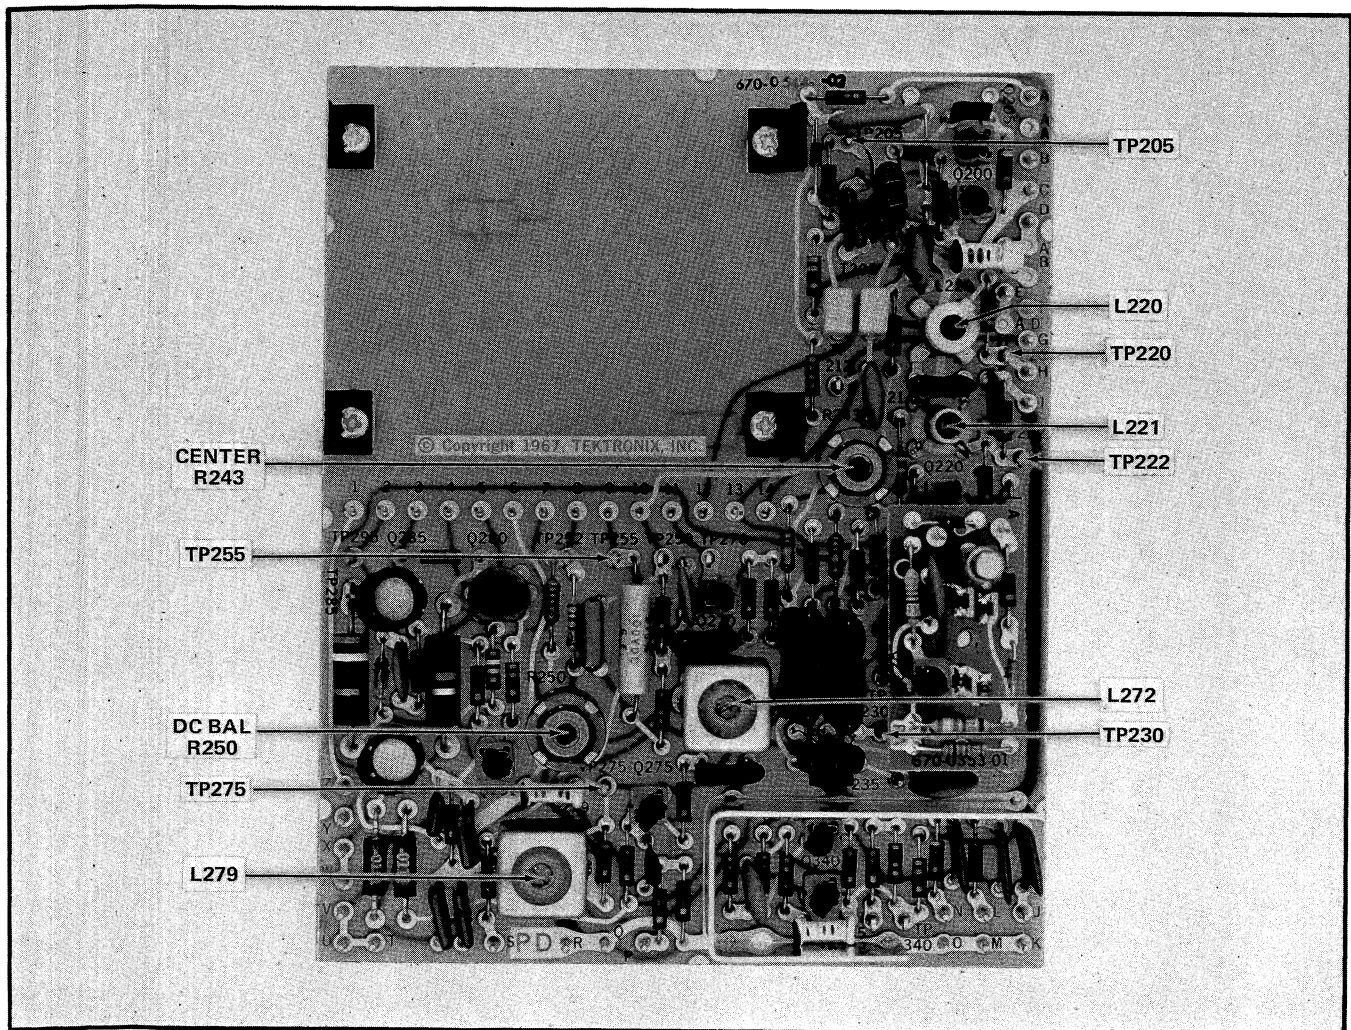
A. Subcarrier regenerator board test point and adjustment locations for instruments SN B251880 and up.
